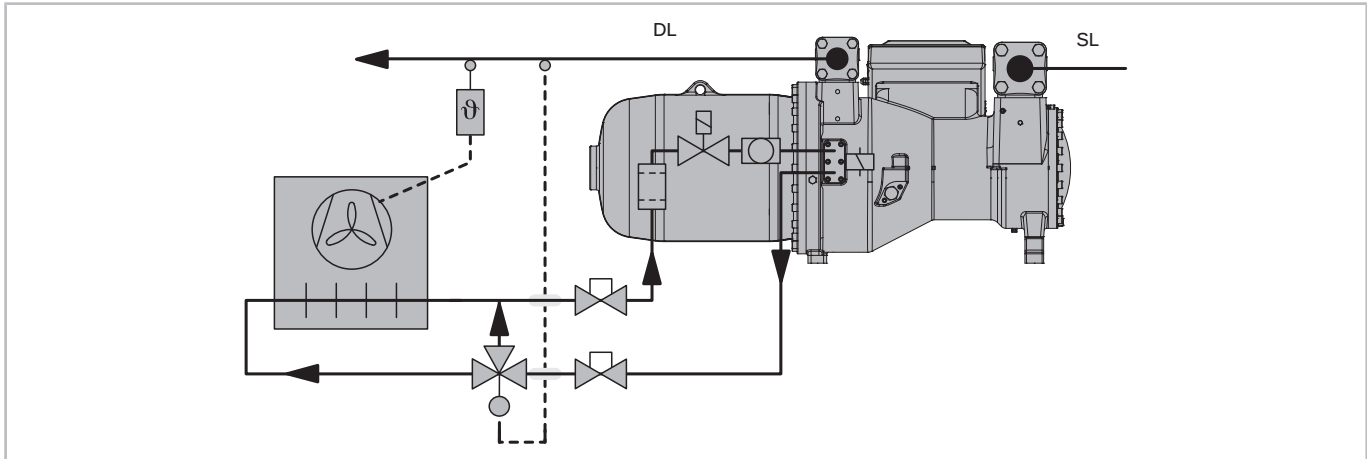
Exemplary oil circuit for CSH compressors with air-cooled oil cooler and separate heat exchanger. Applies to CSVH accordingly.
